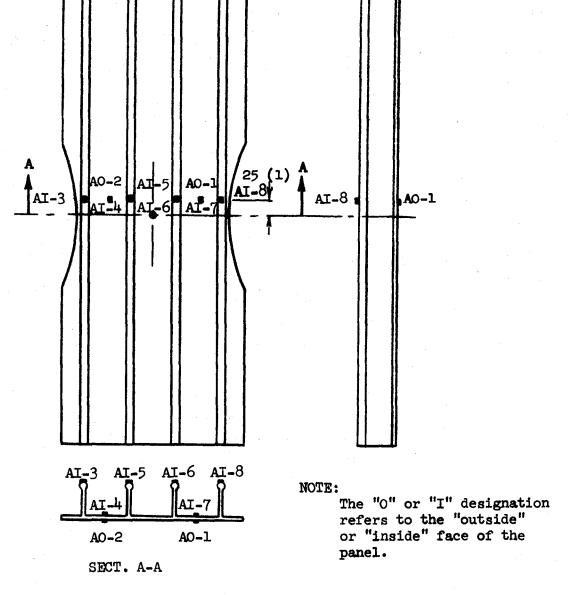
STRAIN GAGE LOCATIONS, PANELS WITHOUT PHOTOELASTIC COATING (DIMENSIONS IN MILLIMETERS AND INCHES RESPECTIVELY)
